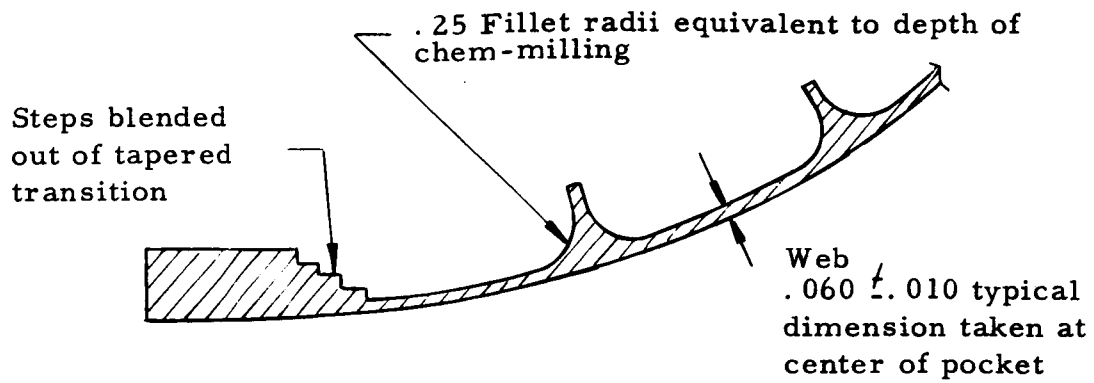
Finish Chem-Milled Forward Bulkhead After Trim
